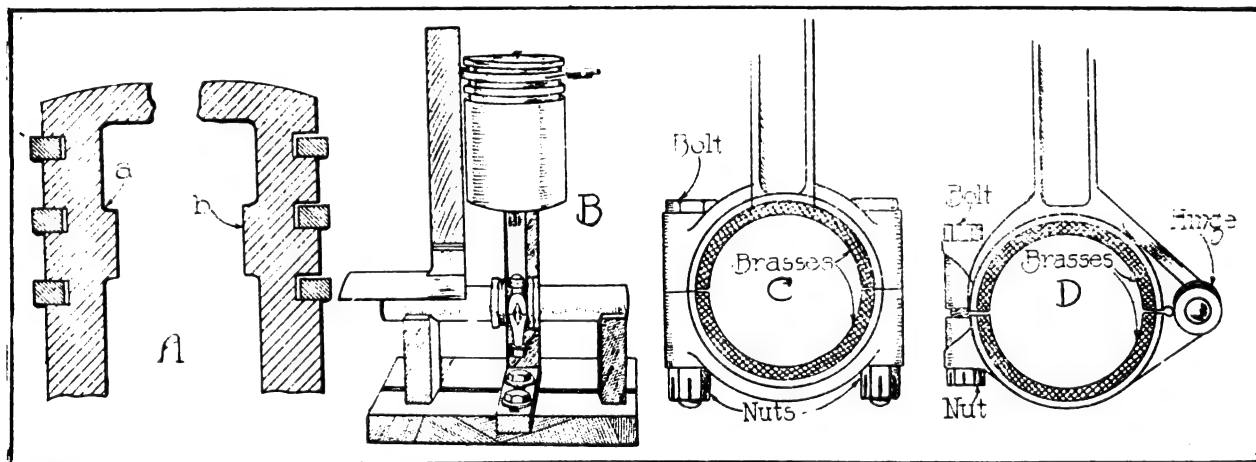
A, "a" Correctly Fitted and "b" Incorrectly Fitted Piston Rings; B, Method of Aligning Piston; C, Cap Type of Connecting Rod; D, Hinged Type of Connecting Rod.
